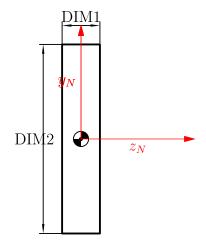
FB: Cross section dimensions in a NASTRAN flat bar.
